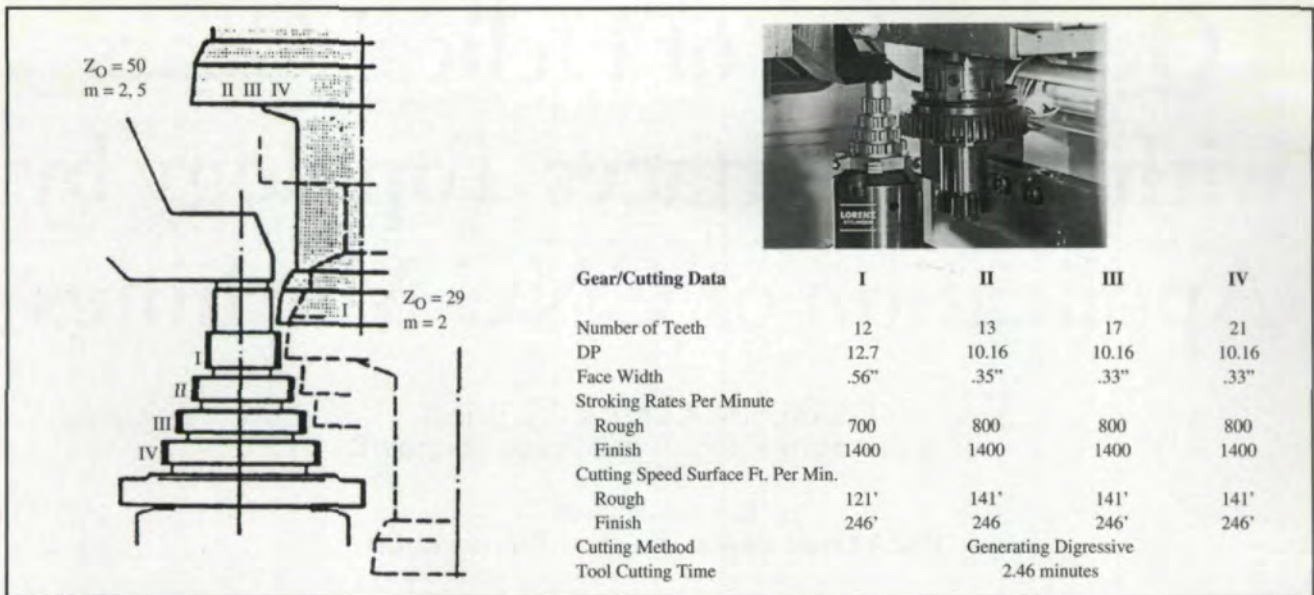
Finish-shaping of a countershaft in a single setup.
